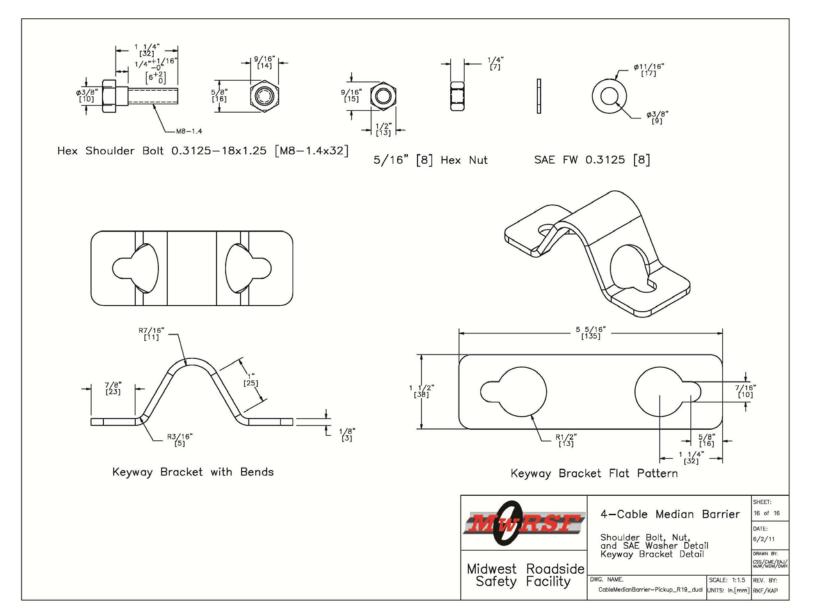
Shoulder Bolt, Nut, Washer, and Keyway Bracket Detail, Test No. 4CMB-1
